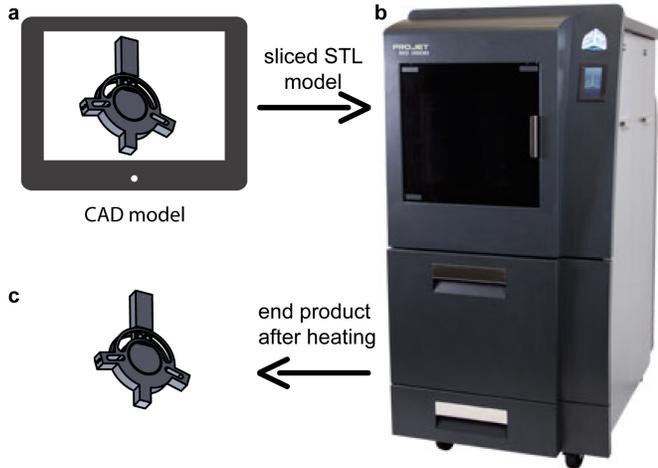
3D printing steps. (a): CAD design and data model generation. (b): 3D printing machine. (c): end product after heating.
